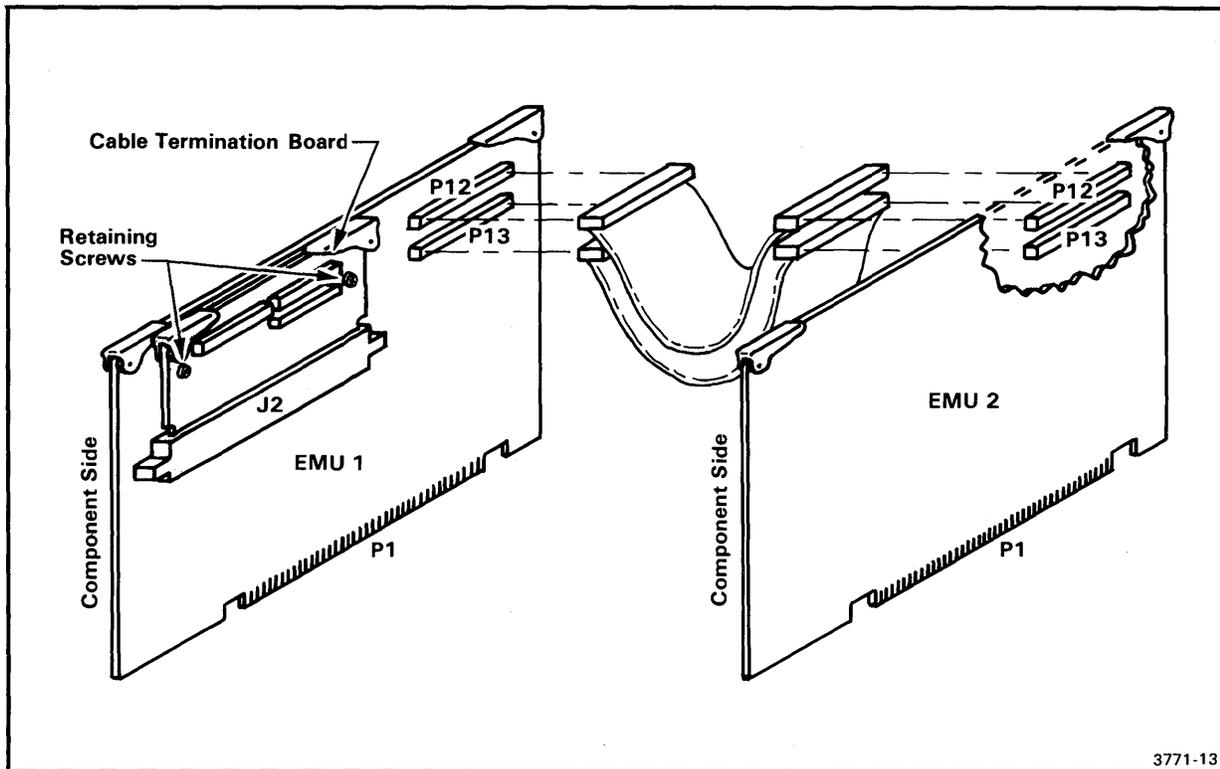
EMU 1/EMU 2 interconnection with Cable Termination board.
